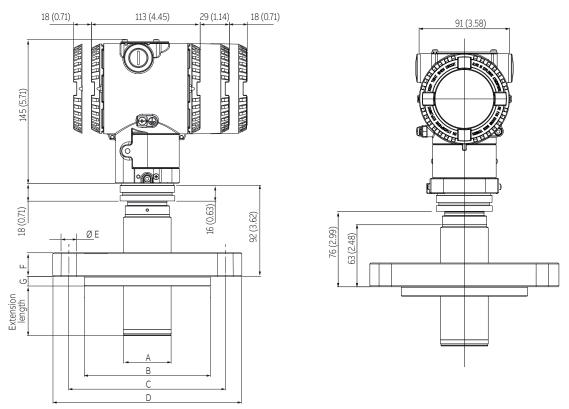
266HRH/266NRH with barrel housing and direct mount seal S26RA/S26RE/S26RJ flanged Raised Face extended diaphragm
